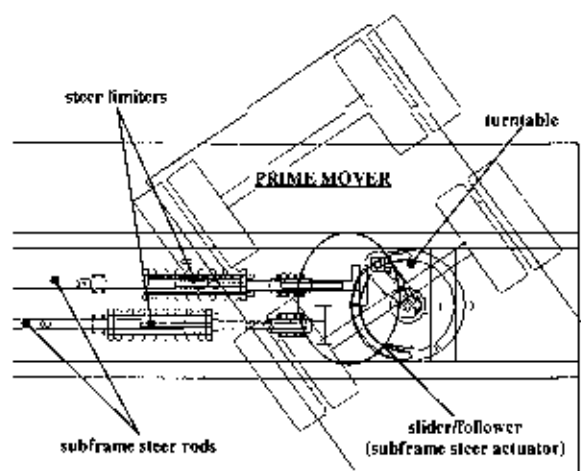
Schematic showing subframe steer-actuating mechanism and steer limiter spring arrangement.
